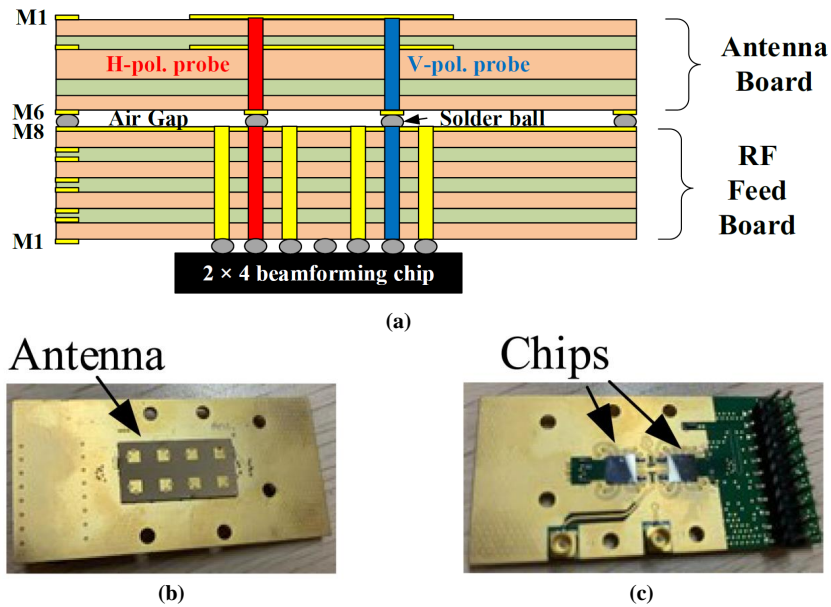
A 2×4 dual-polarized phased array at 28 GHz using surface-mounted antenna packaging. (a) PCB stack-up. (b) Top view of fabricated prototype. (c) Bottom view of fabricated prototype. [13]
